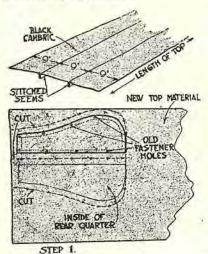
The side pads are a single strip of cambric 9" wide and sewed as shown.
